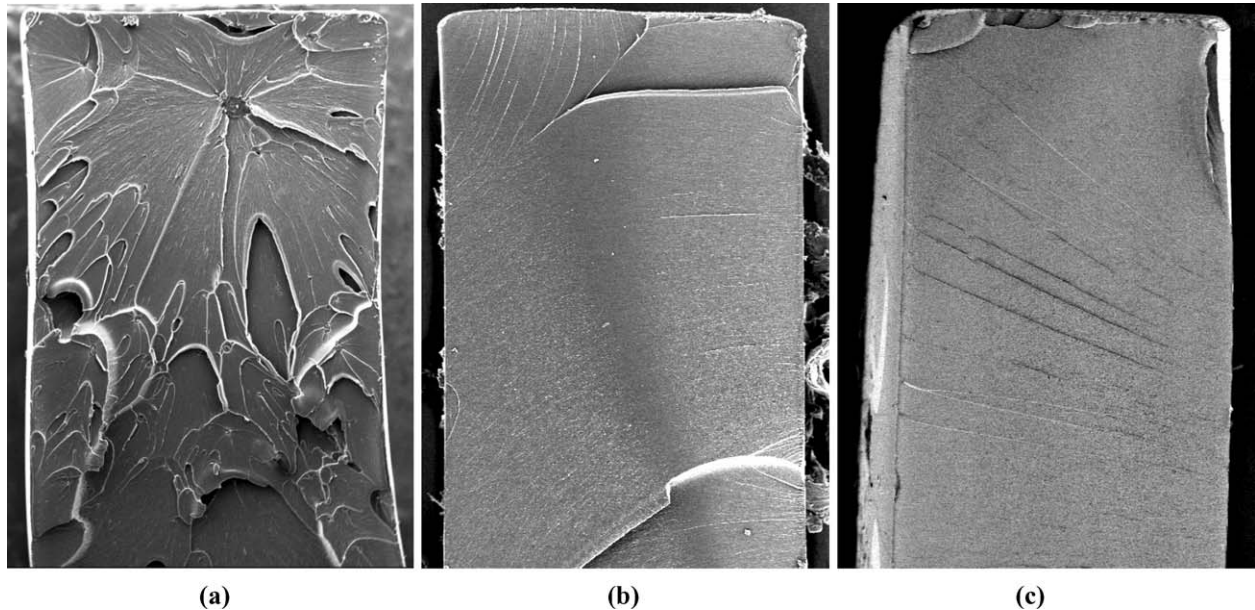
SEM micrographs of fracture surfaces from: (a) a tensile-fractured injection-molded specimen without fatigue loading, (b) a tensile-fractured extruded specimen after the fatigue loading at 25 MPa for 500 cycles, and (c) a tensile-fractured extruded specimen without the fatigue loading.
